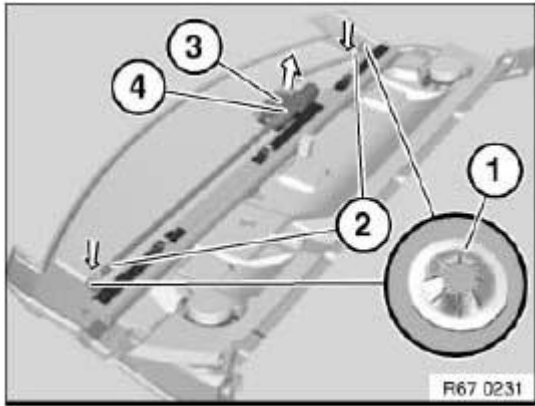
Releasing Screw And Removing Complete Drive Linkage
